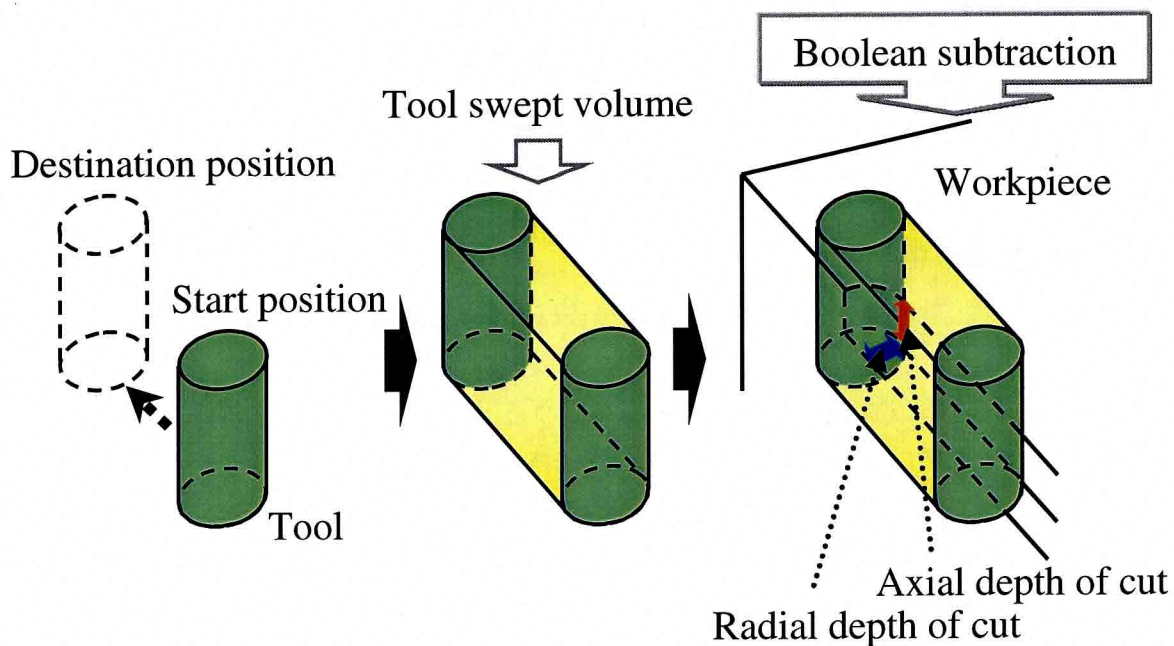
Boolean Subtraction Between Workpiece and Tool Swept Volume
